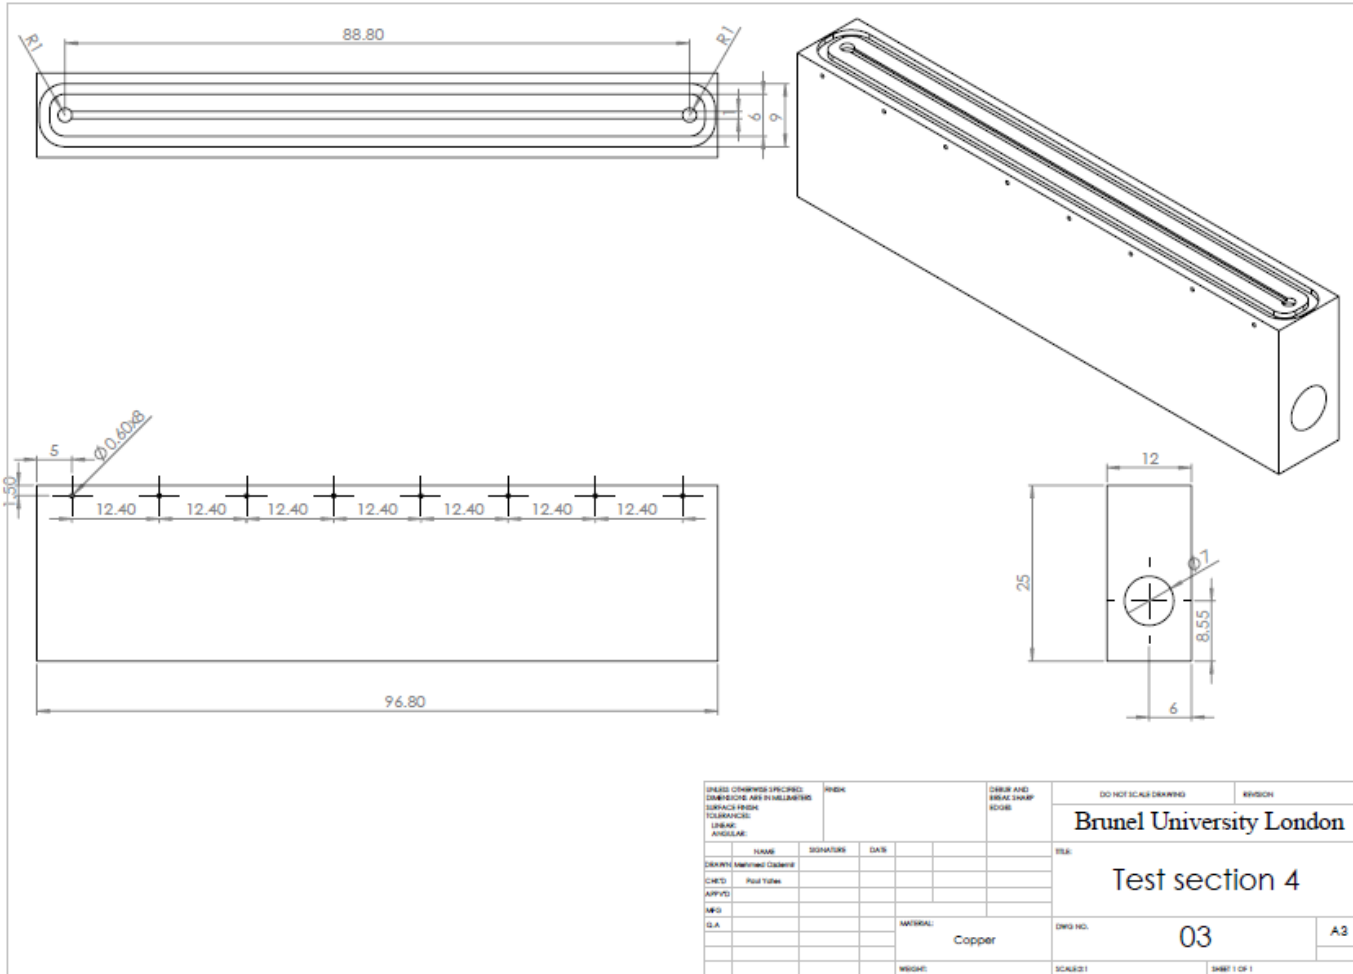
Engineering drawing of the microchannel test section 4 (TS4), dimensions in mm.
